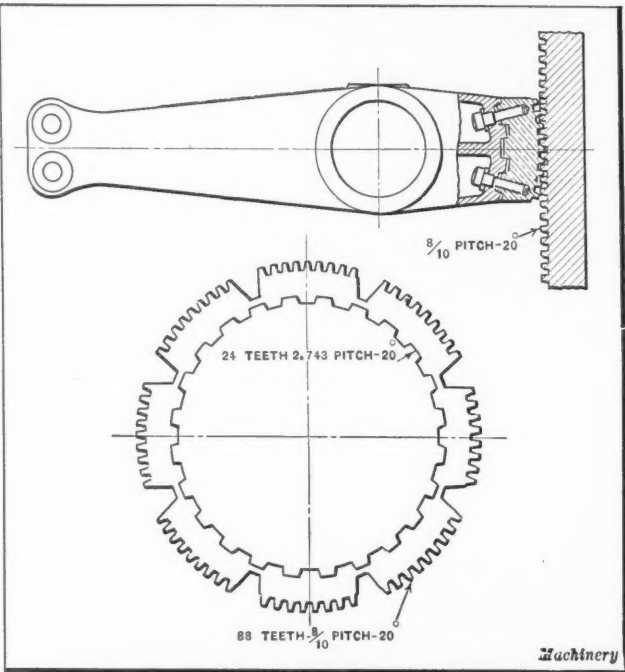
Method of holding Gear Segments by Means of Gear Teeth instead of using Keys
